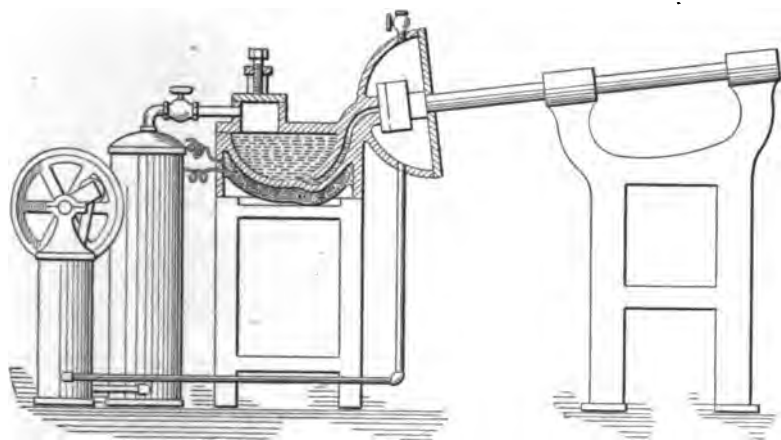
MACHINE WITH DIE ENCLOSED IN VACUUM CHAMBER.
